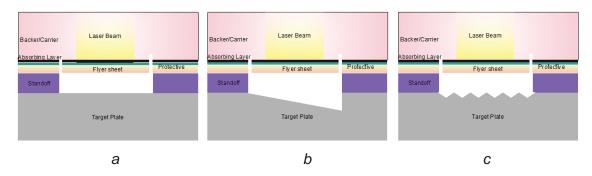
Three modes of developing laser impact weld targets: a) flat, b) angled and c) corrugated.
